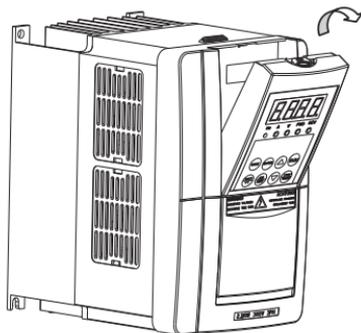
Mounting Demonstration of the operator panel and connecting wire of the inverter Model A
